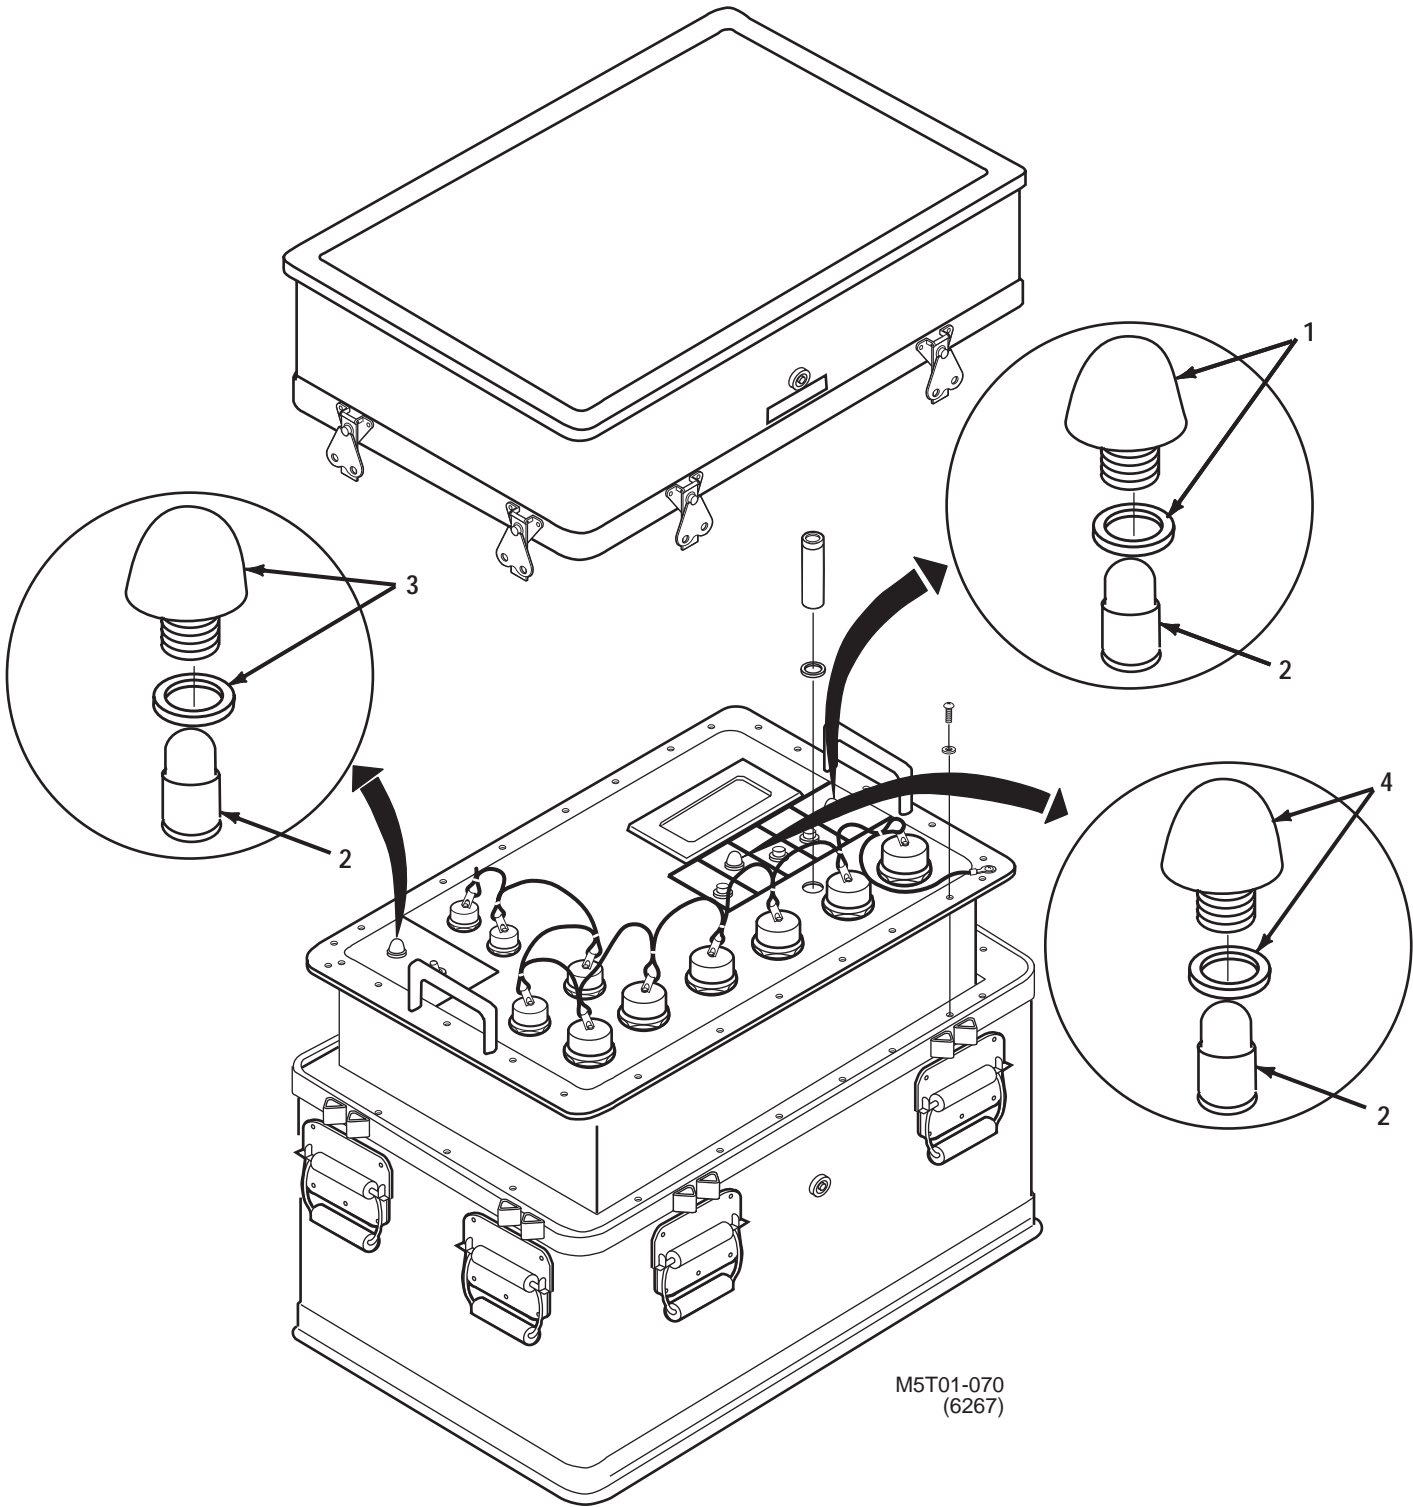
Group 01A0101 Operator Interface Unit Electronics Assembly 12309754
